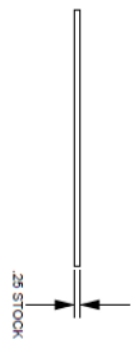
(GUIDE TUBE) ROUND ELECTRIC WELDED STL TUBING
